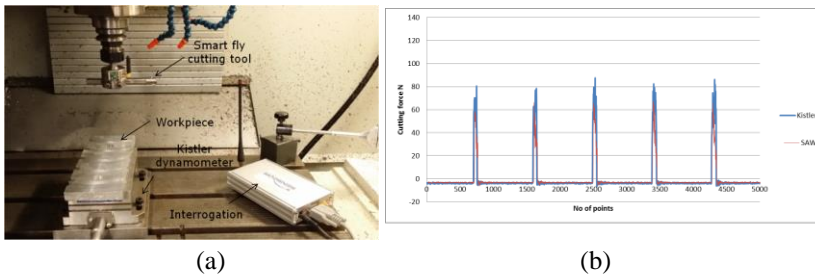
(a) Experimental setup including smart fly-cutting tool, workpiece, Kistler dynamometer and interrogator; (b) Comparison between Kistler dynamometer and SAW-based smart cutting tool on cutting force measurement in fly-cutting
